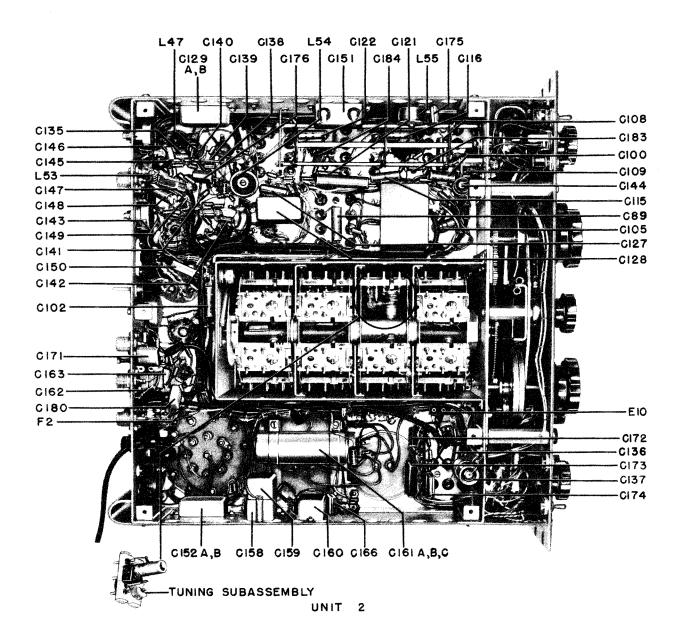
Receiver R-450/FRR-28, Bottom View, Location of Components
